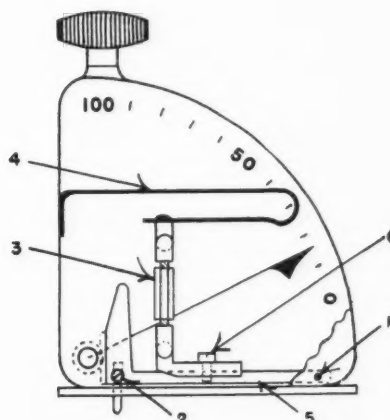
Schematic View of Type "A" Durometer Mechanism, Showing (1) Indenter Arm Bearing, (2) Indenter Adjusting Screw, (3) Turnbuckle in Load Spring Linkage, (4) Load Spring, (5) Indenter Arm, and (6) Adjusting Screw
